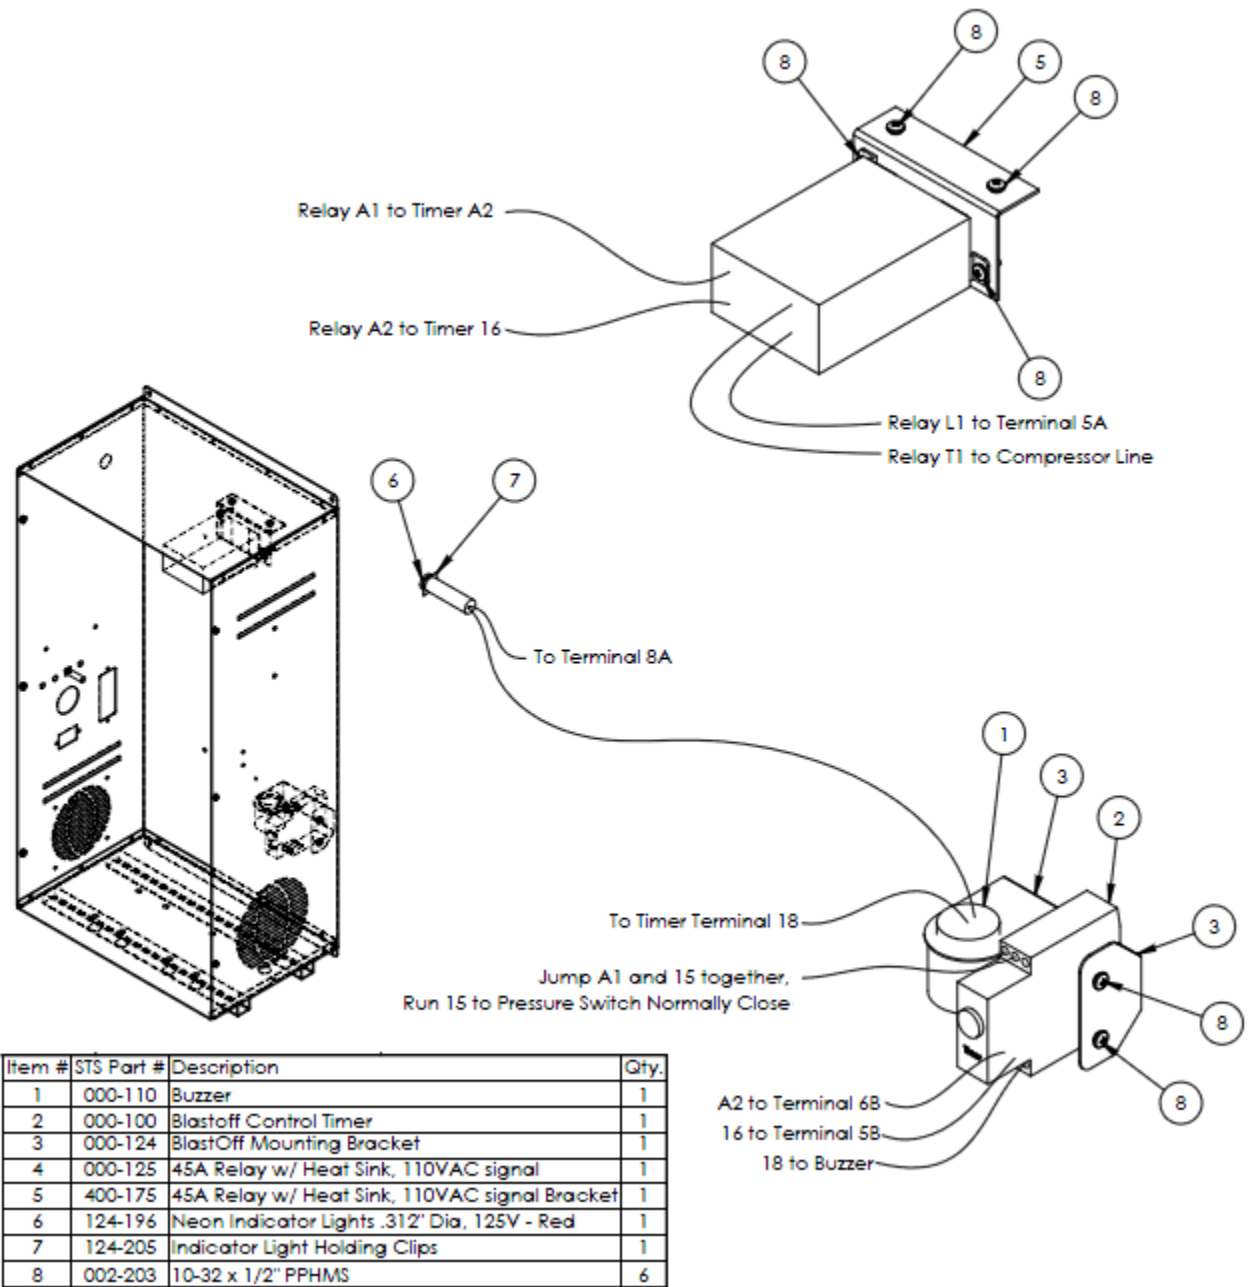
A00-NM-00-01, BlastOff™ Assembly
